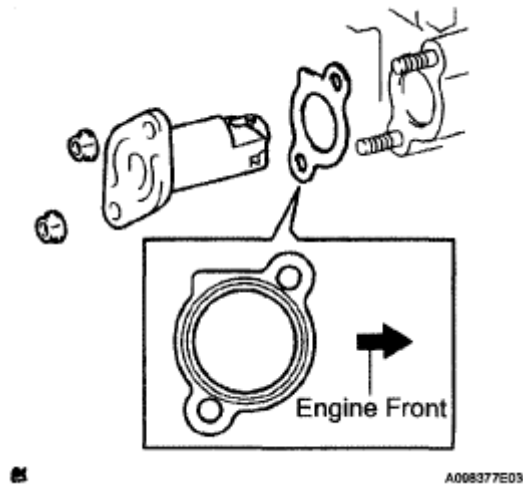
Identifying Chain Tensioner, Gasket And Nuts
